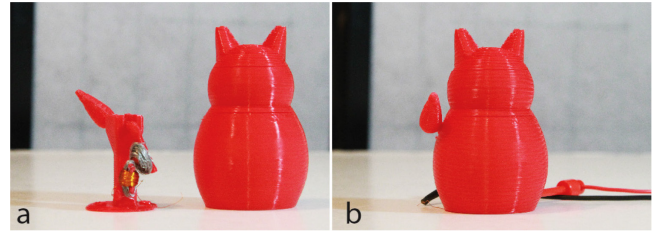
a) A printed *Lucky Cat* figurine; b) Arm is activated with a printed coil.
